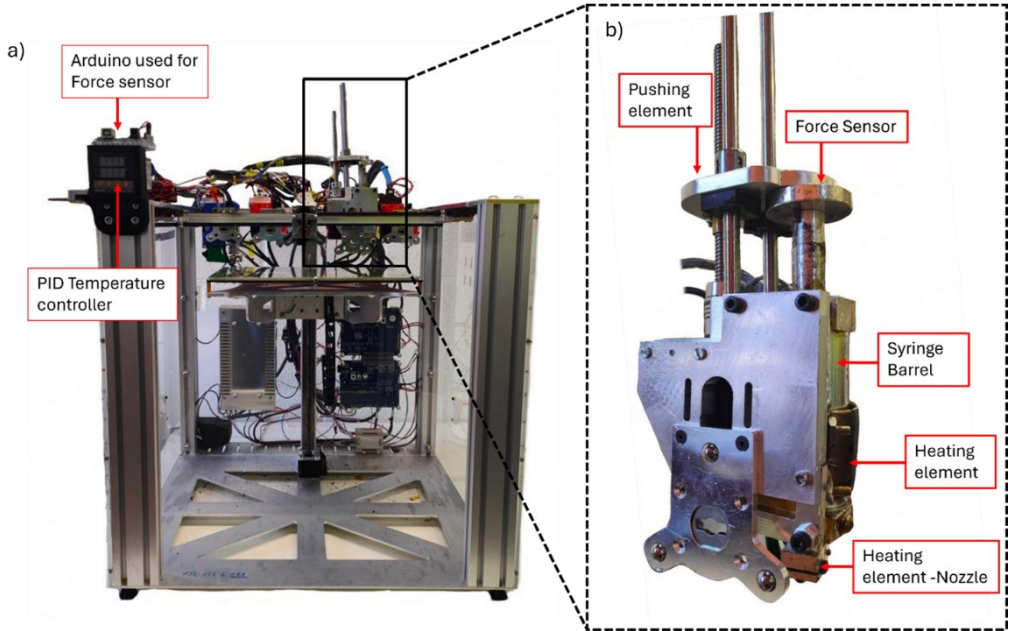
Custom-made material extrusion 3D printed: a) E3D ToolChanger machine modified to extrude filament- and ink-based self-healing materials in the same printing cycle, b) custom-made ink-based heads equipped with metal syringe to extrude the thermoset self-healing.
